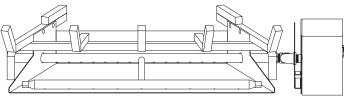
B - Burner Pan with Millivolt Gas Control Valve
